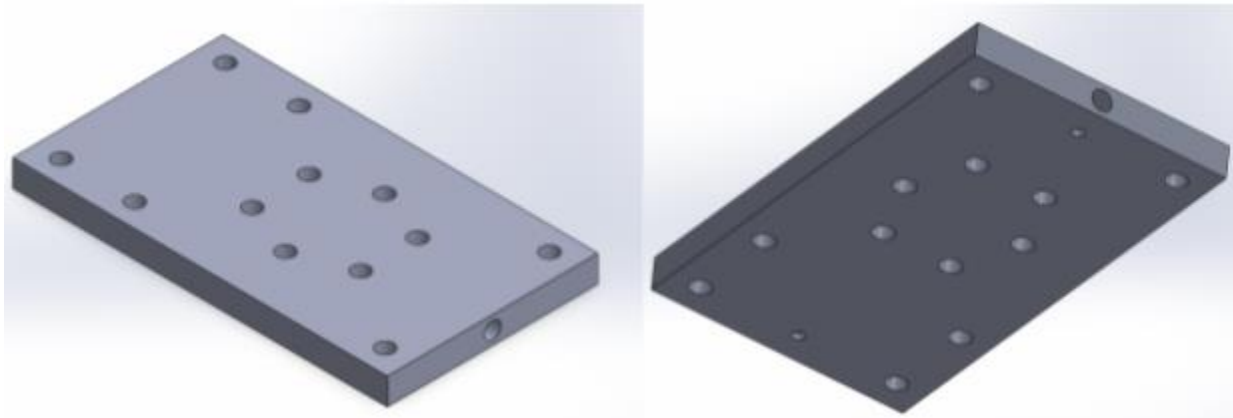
Isometric view of Top Plate & View of the bottom/edge of the bottom plate.
